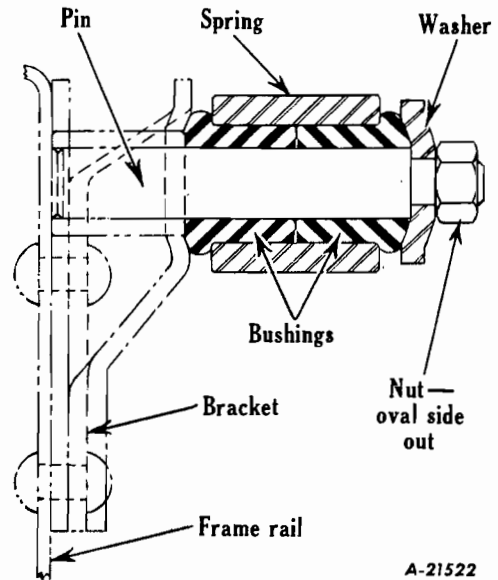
Rear Spring Front Bracket For Models L-110, L-120, LM-120.
